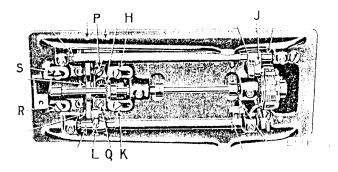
Oiling Points in Base of Machine, also Adjustments on the Machine
